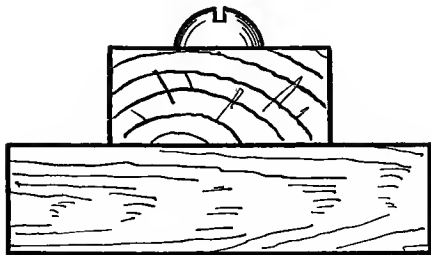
Head of Round-Head Screw. Stands Above the Surface
